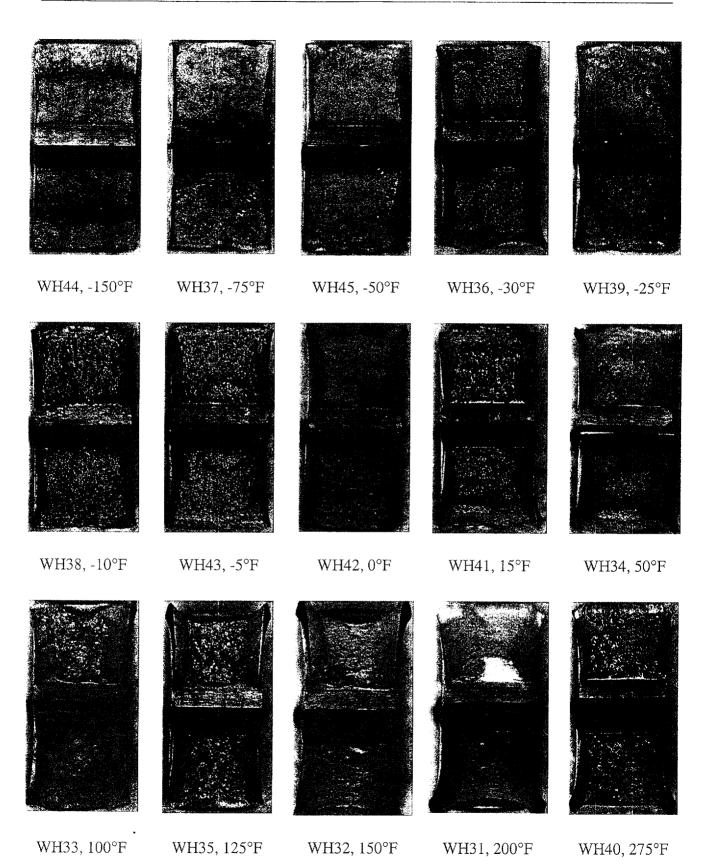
Charpy Impact Specimen Fracture Surfaces for Beaver Valley Unit 2 Reactor Vessel Heat-Affected-Zone Metal
